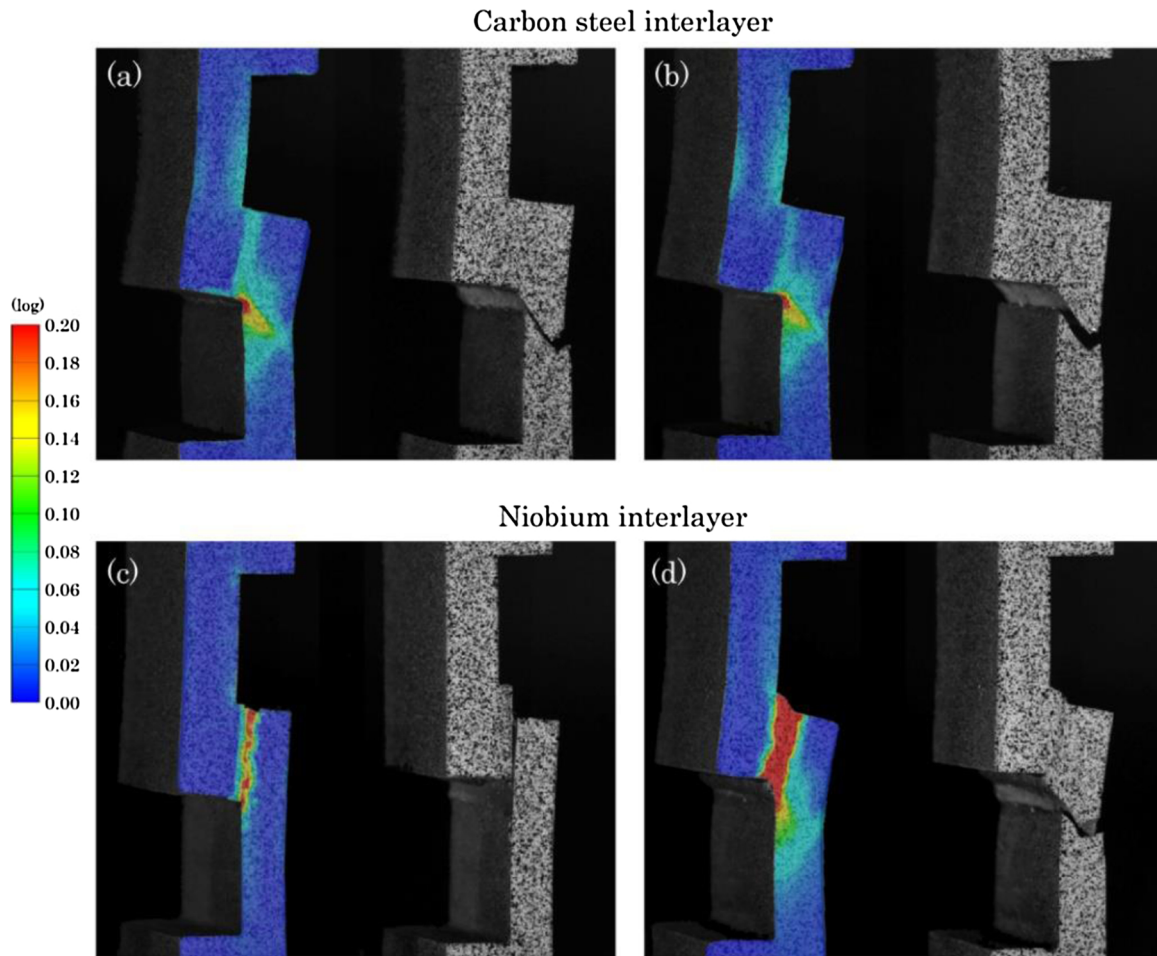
DIC of the weld with the CS interlayer: samples 1-CS (a) and 2-CS (b); and with the niobium interlayer: samples 1-Nb (c) and 2-Nb (d).
